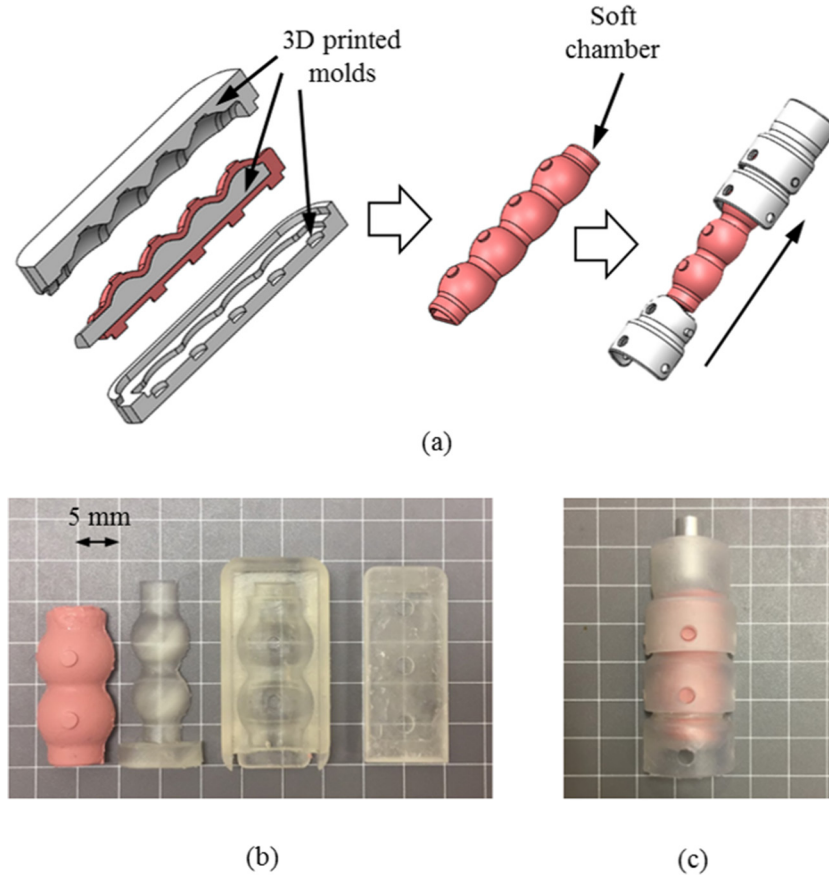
Fabrication process of the hybrid actuator. (a) The diagram showing the general fabrication process using one-step molding and 3D printing techniques. (b) The molds for one-step molding and the molded soft chamber. (c) The assembled hybrid actuator.
